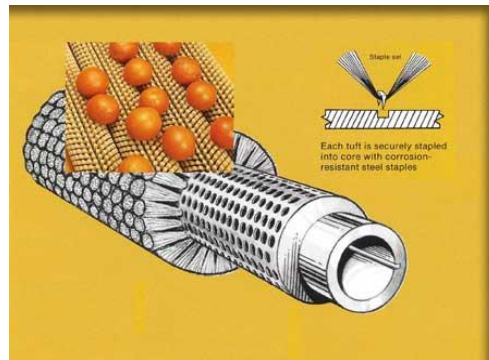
Staple set cylinder brushes (www.industrial-brush.com)
